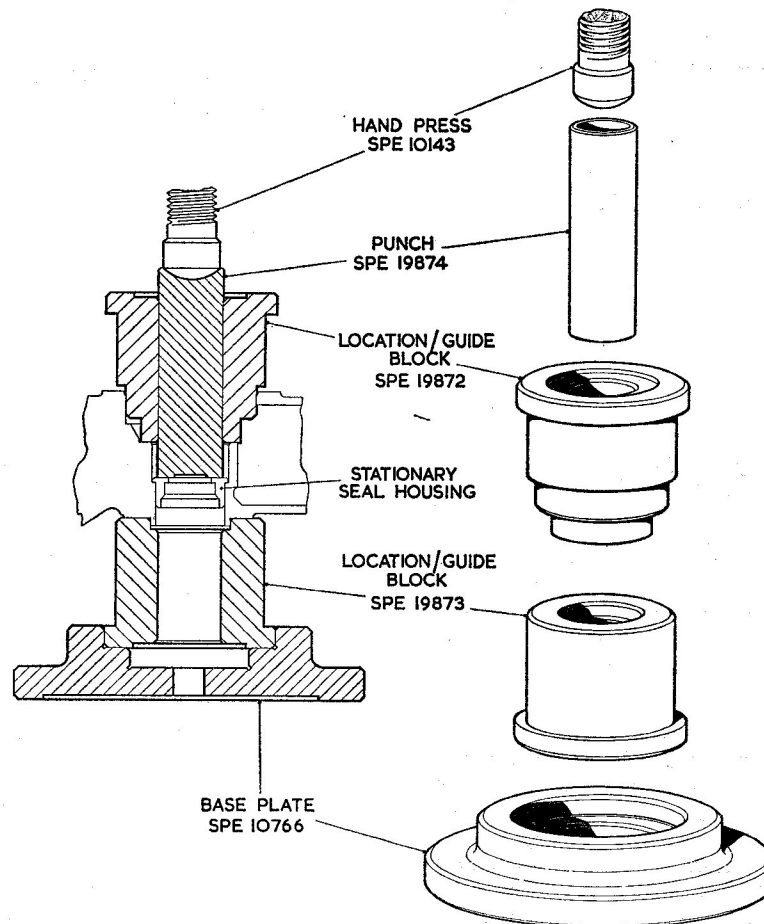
Tools for assembling the stationary seal seat to the pump casting
